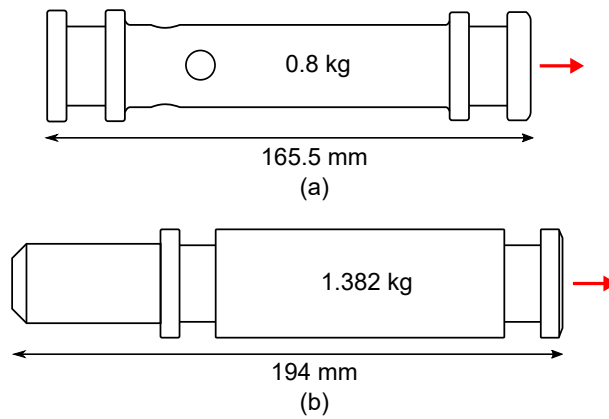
Pistons machined for the experiments: (a) Piston 1 made of steel AS1444-4140, and (b) Piston 2 made of steel AS1444-4340.
